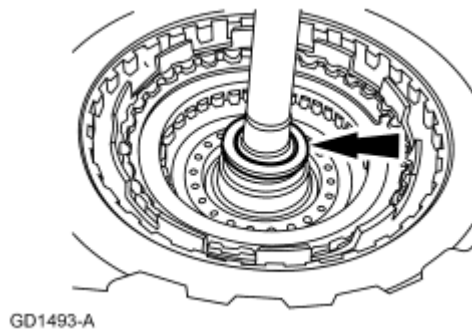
No. 4 Turbine Shaft Thrust Bearing
